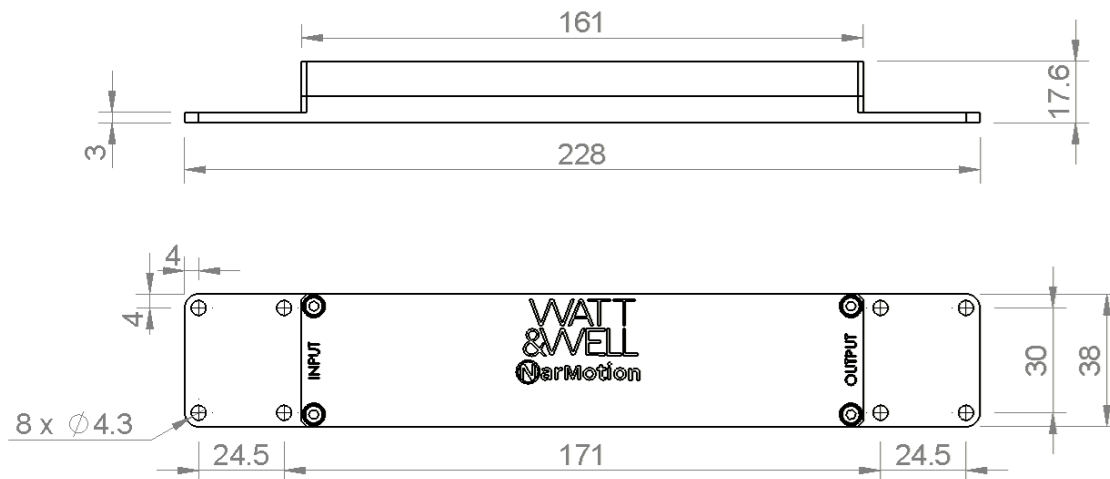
NM-38-250-2-XXXX-L Mechanical Dimension
